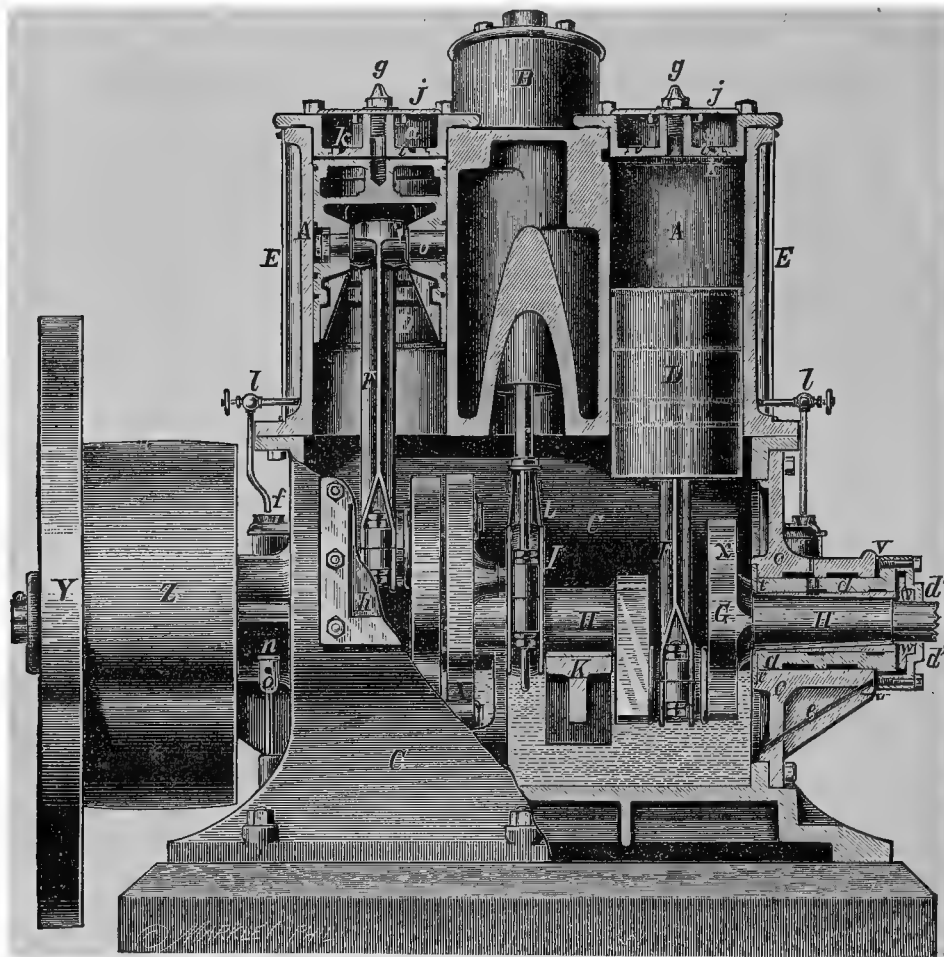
WESTINGHOUSE ENGINE, SECTION THROUGH CYLINDERS.
